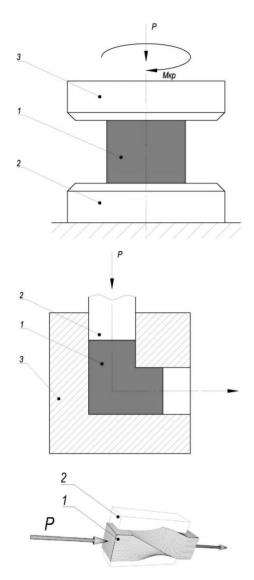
Intensive plastic deformation (IPD) processing schemes: high pressure torsion: 1 – part; 2 – anvil; 3 – die; b) equal-channel angular pressing (ECA pressing): 1 – part; 2 – male die part; 3 – female die; c) spiral extrusion: 1 – part; 2 – spiral female die.
